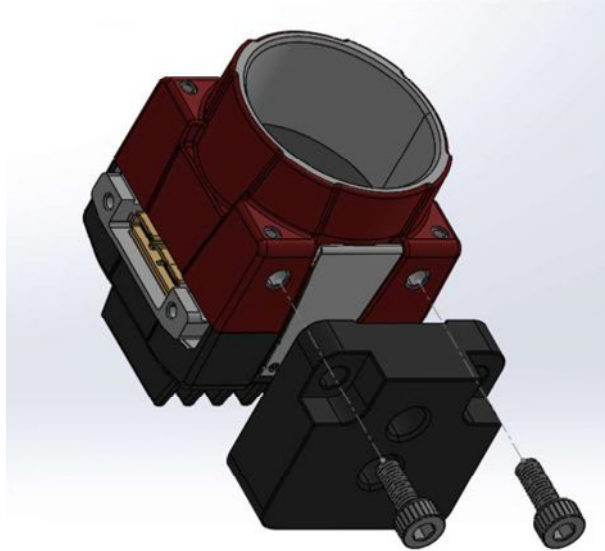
Adapter Connects to Bottom of Camera for $\frac{1}{4}$ -20 or M6 Mounting.
